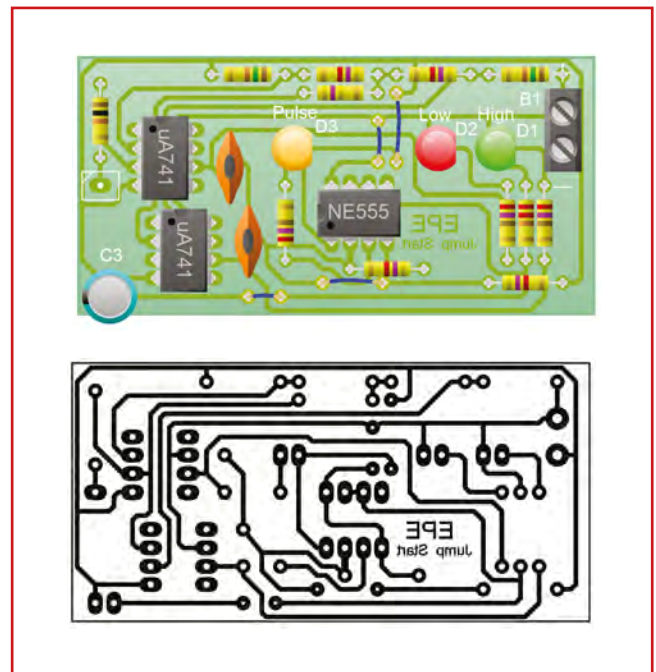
Printed circuit board (PCB) component layout and track layout viewed 'through' the board for the *Logic Probe*. Final size is 70mm x 36mm
